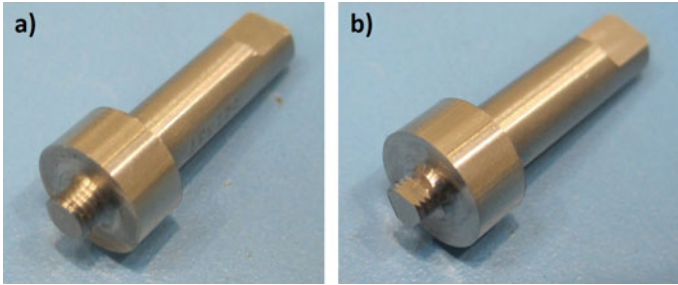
FSW tools used to produce the welds. a Conventional threaded tool and b tool with 3 flats
